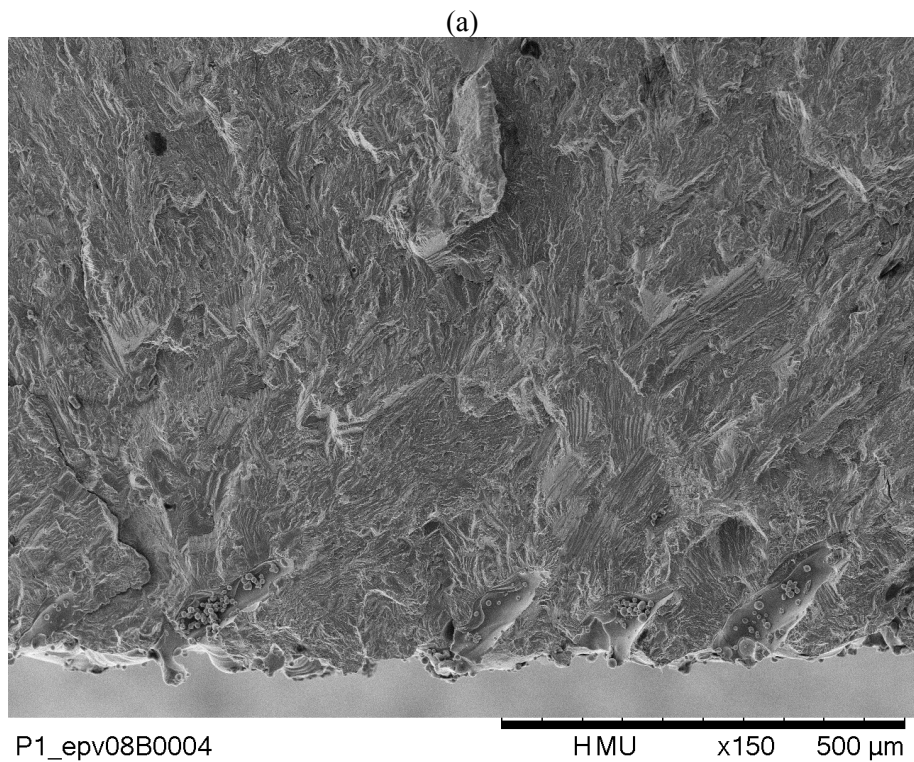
Defects observed on the as-built lateral surface of simple-polished bending specimens:
